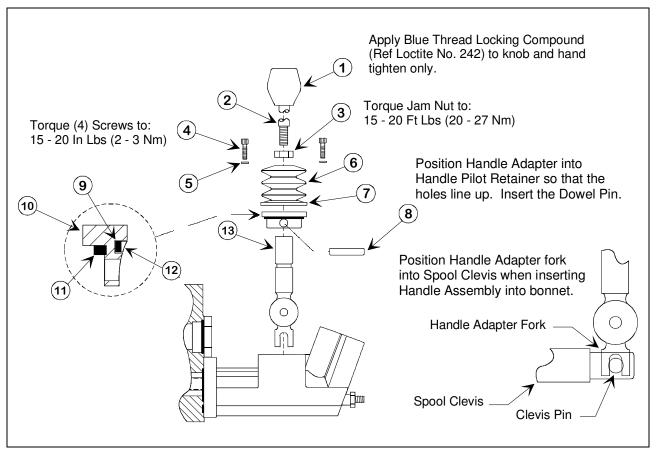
[SOL-IH] and [EPC-IH] Handle Assembly
